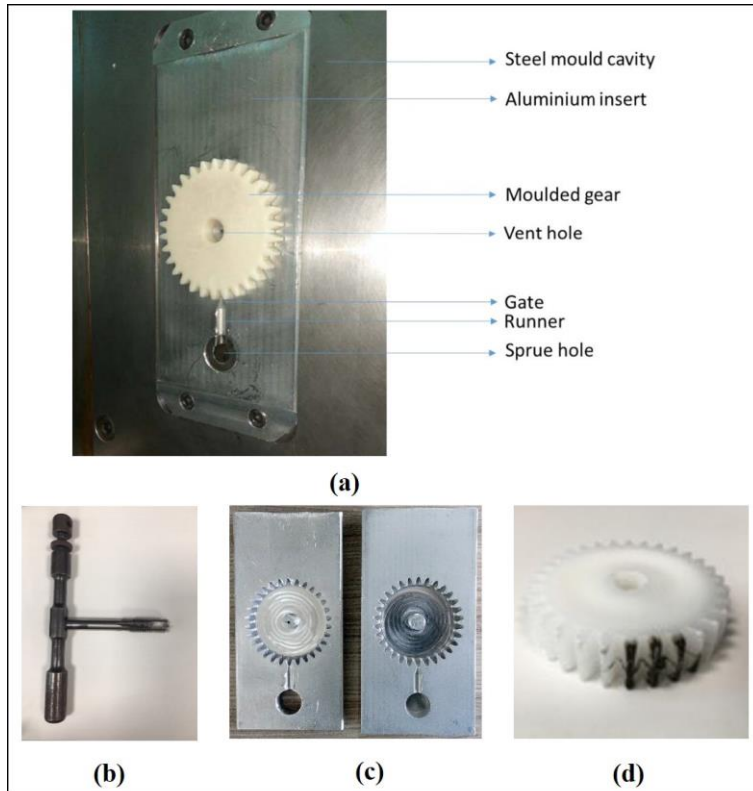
(a) Preliminary mould design (b) Screwdriver tool for gear ejection (c) Preliminary mould cavity design (d) A manufactured gear sample with preliminary mould design
